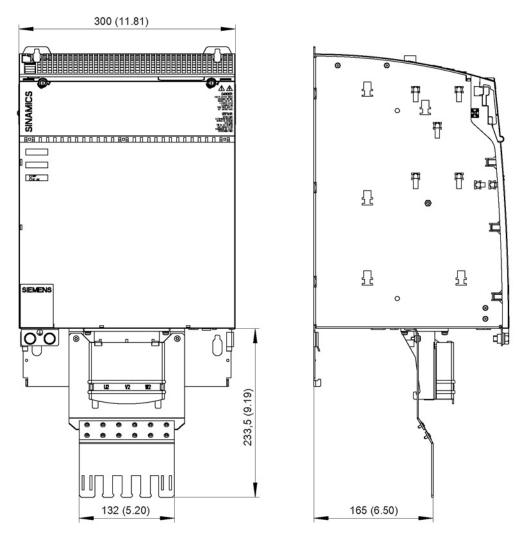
Dimension drawing of shield connecting plate on a 300 mm component with internal air cooling, all dimensions in mm and (inches)
